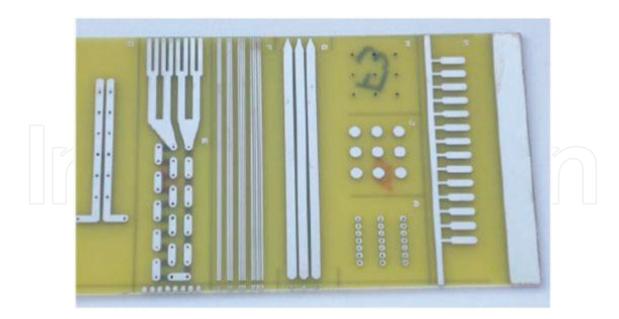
A PCB presenting copper tracks immersion plated with Ag from DESs [79].
